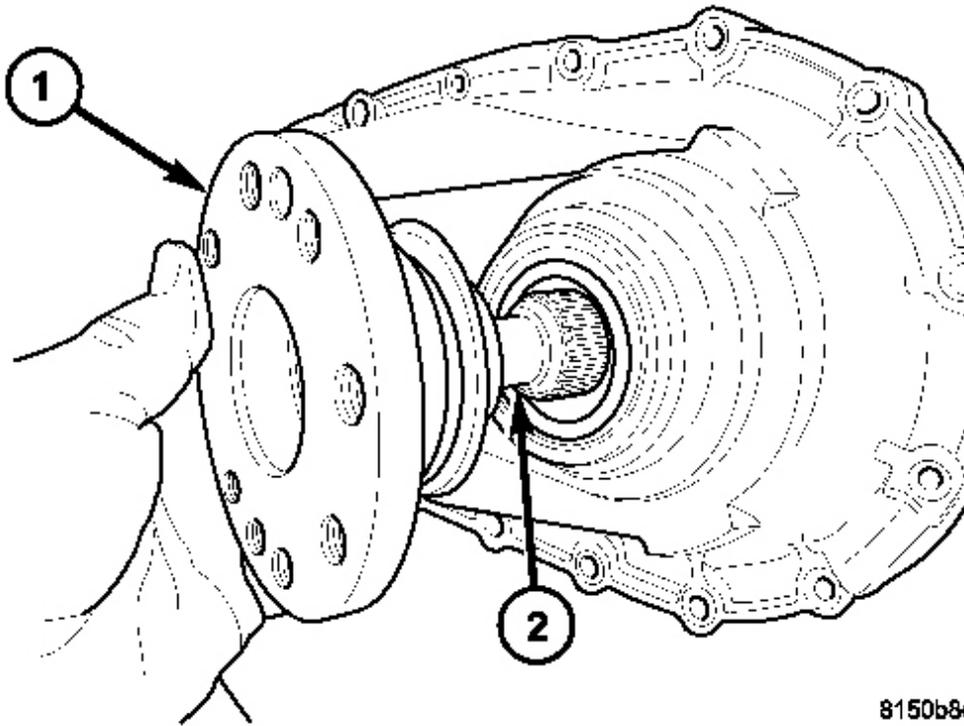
Remove/Install Rear Output Shaft Flange
